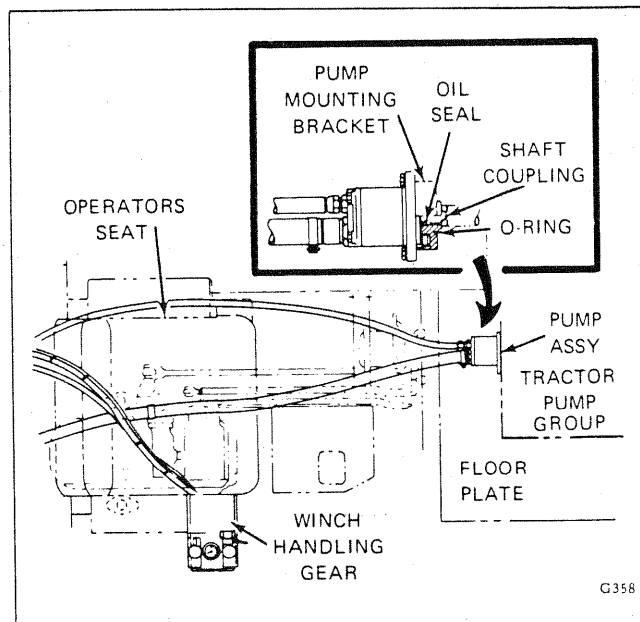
REMOVAL OF HYDRAULIC PUMP ASSEMBLY (D6 TRACTOR SERIAL NUMBER 74A THROUGH 76A AND UP, AND 10K1 AND UP)
